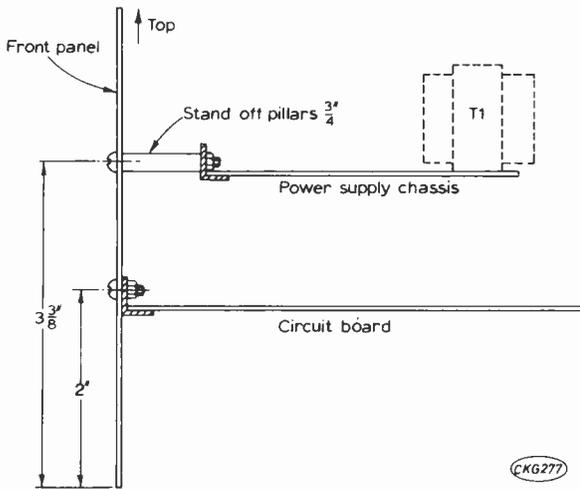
(left): Location of the main circuit board and the power supply chassis behind the front panel.
